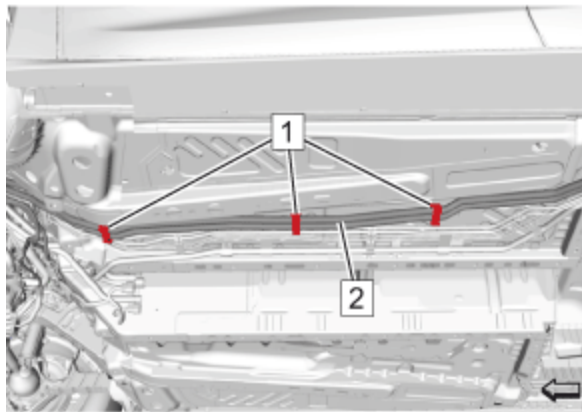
Drive Motor Generator Control Module Cooling Outlet Hose
